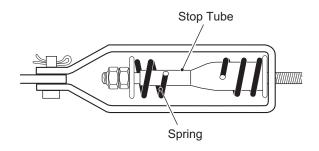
Compensator Assembly Kick-Off Actuating Linkage
